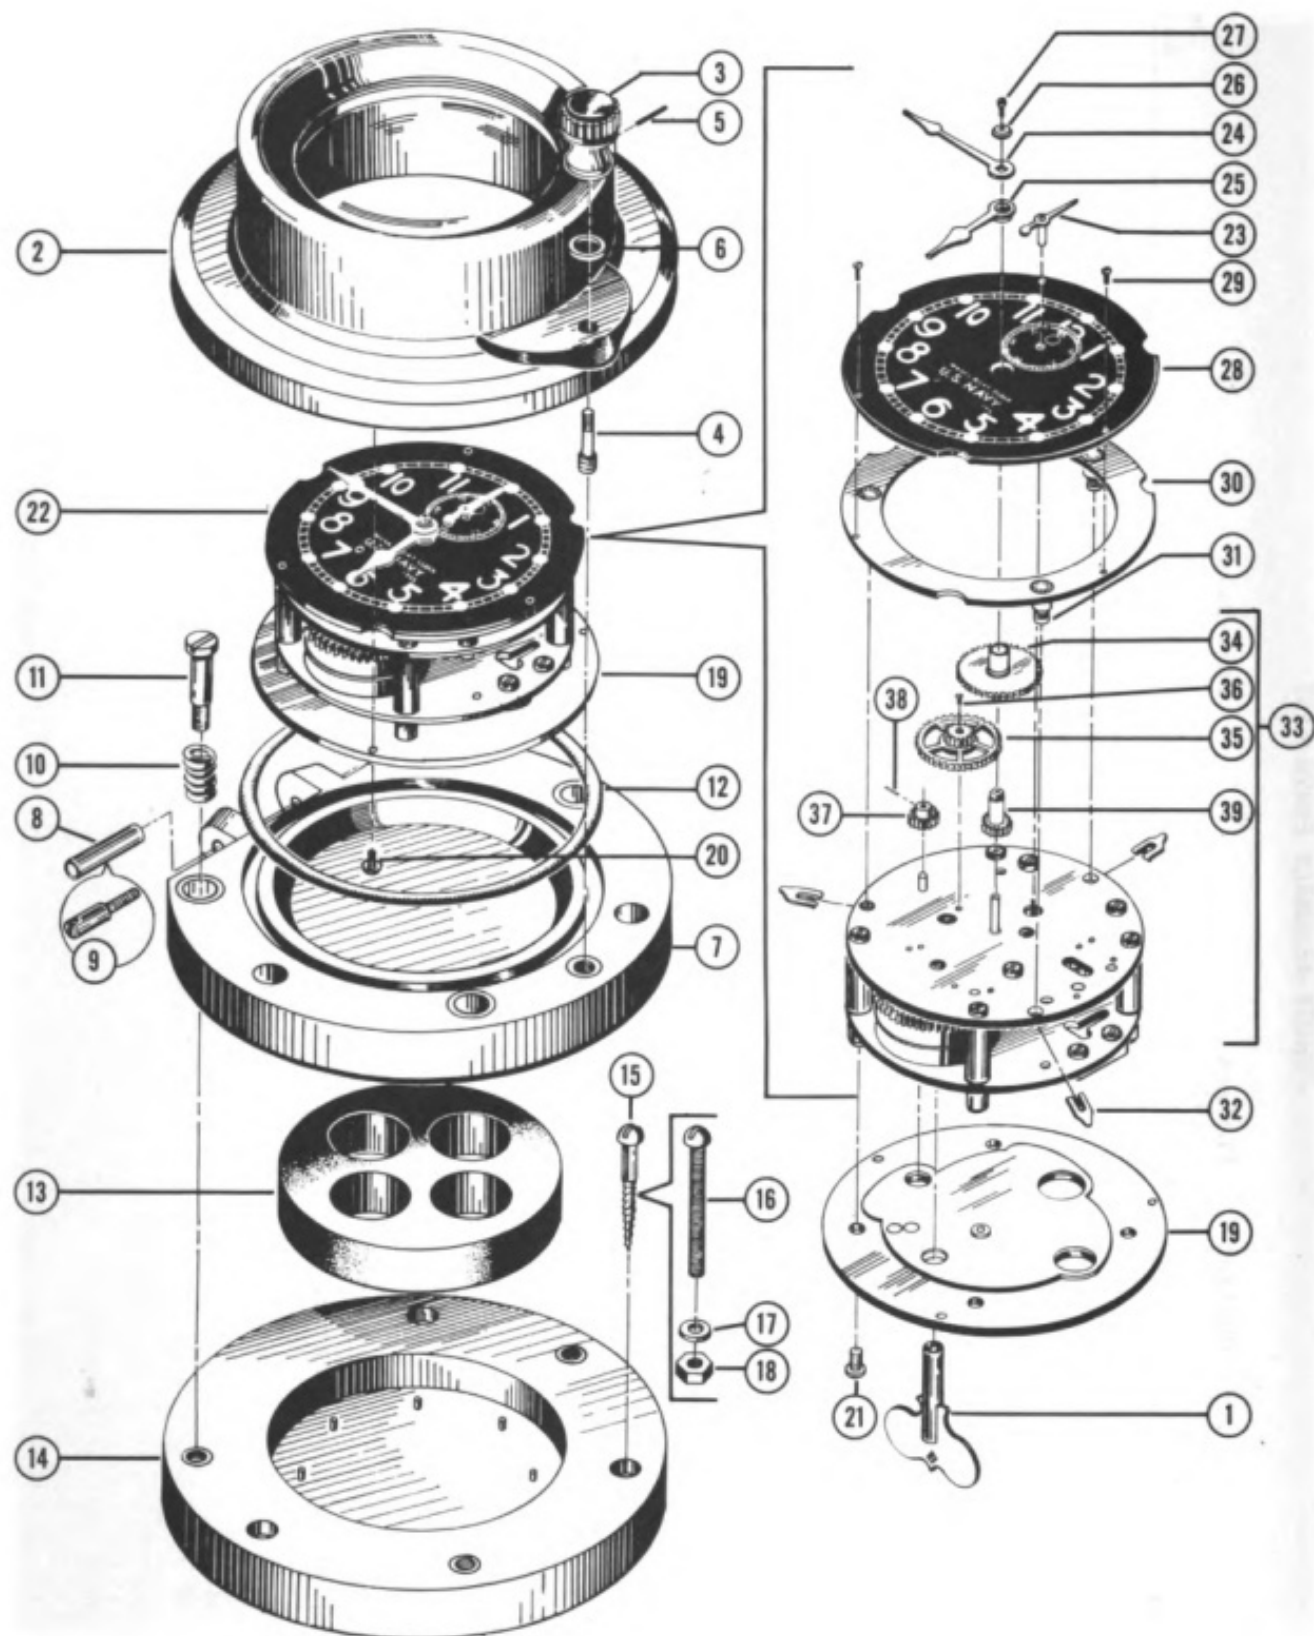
Chelsea No. 17E Boat and Deck Clocks, Main Assembly—Exploded View
